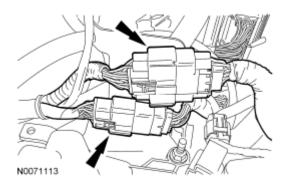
Identifying Engine Harness Electrical Connectors Courtesy of FORD MOTOR CO.
